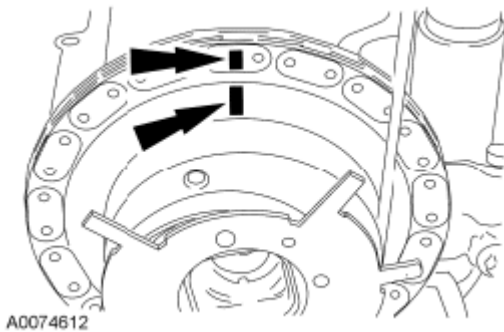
Locating Mark On Timing Chain And Camshaft Phaser And Sprocket Assembly
